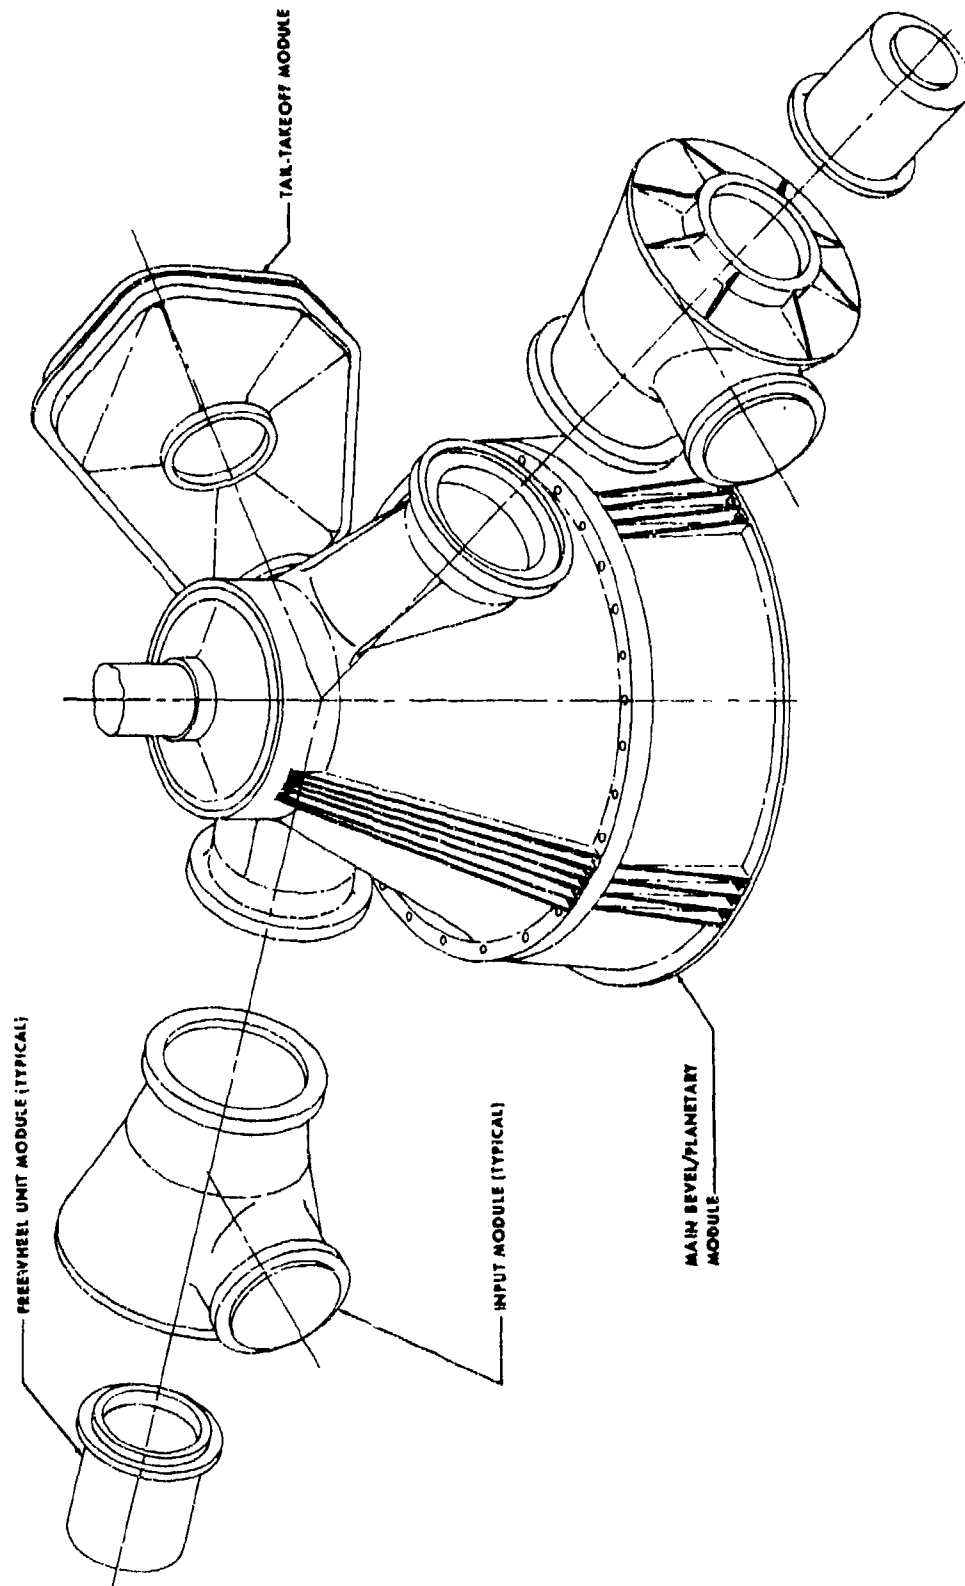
CH-54 MODULARIZED GEARBOX ISOMETRIC
